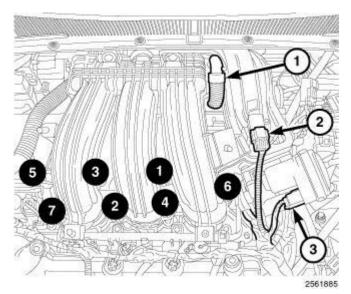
Locating Manifold Bolts, Manifold Absolute Pressure Sensor & Electronic Throttle Control Electrical Connectors
